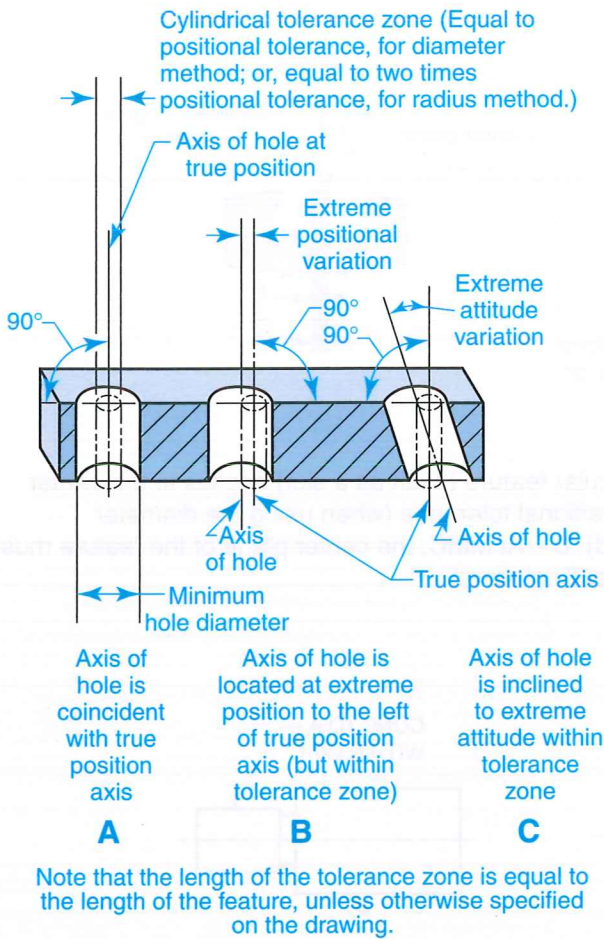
The tolerance zone for a hole is assumed to be a cylinder for the full depth of the feature. (American Society of Mechanical Engineers)
